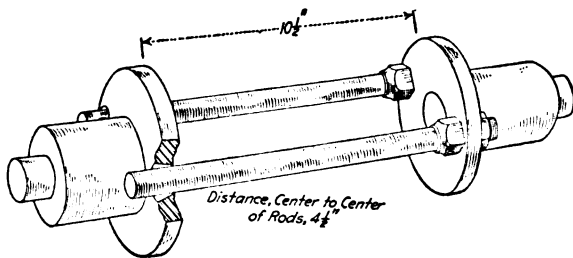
DETAILS OF "SQUIRREL-CAGE" TYPE OF SPRING
